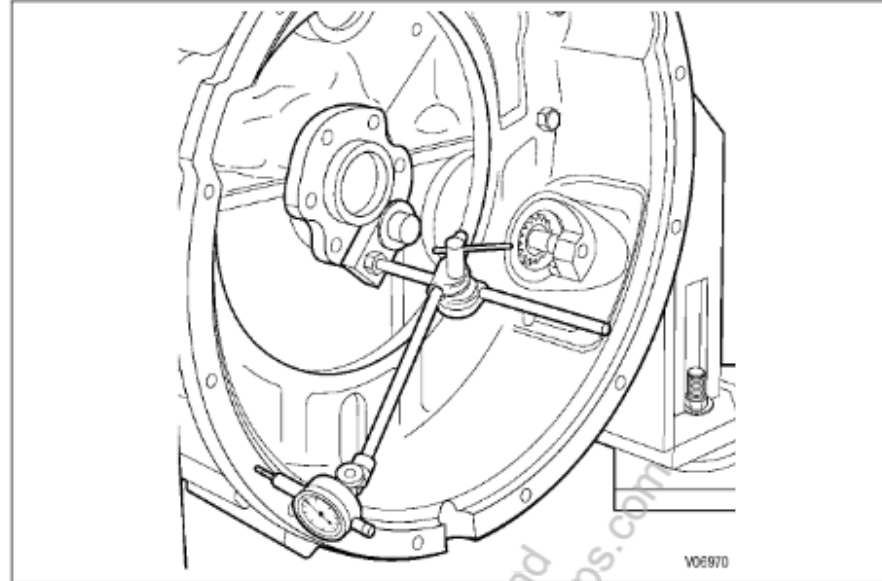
Measuring Flywheel Housing Bore Eccentricity Of The Flywheel Housing Bore
